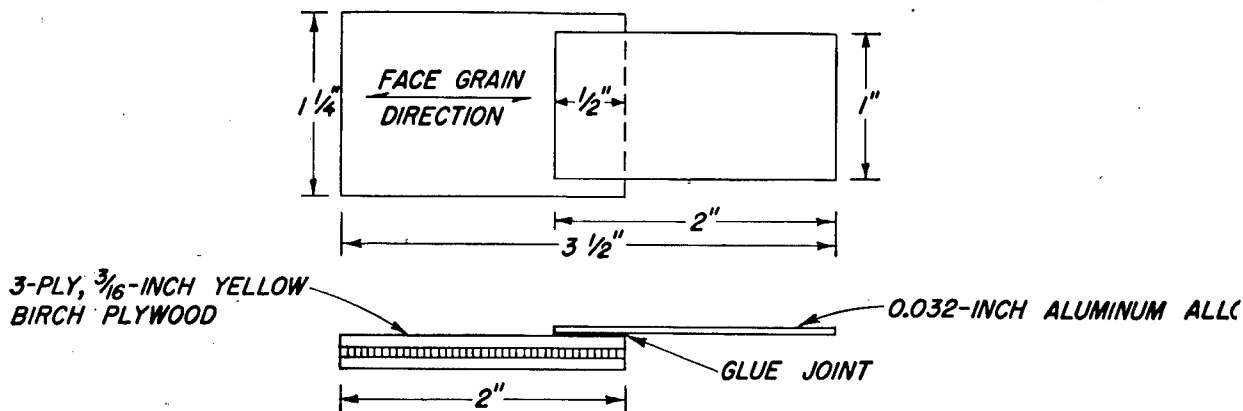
Plywood-to-metal lap-joint shear-test specimen.
